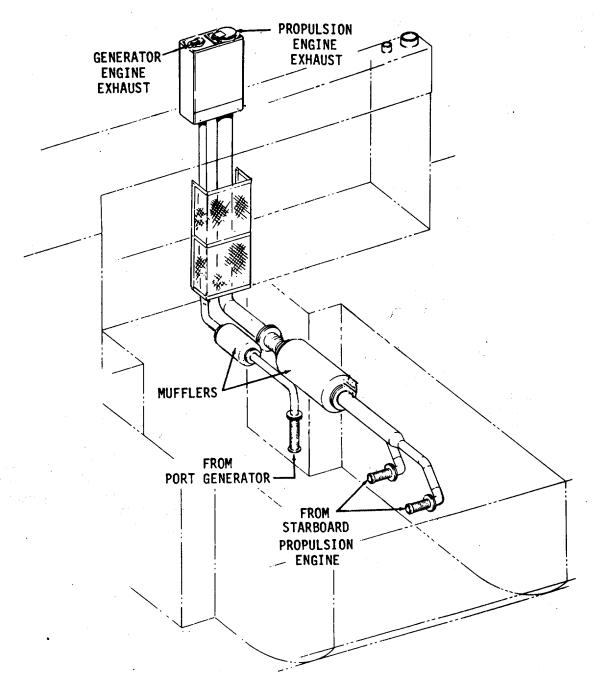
Diesel Engine Exhaust Piping/Forward Engine Room
